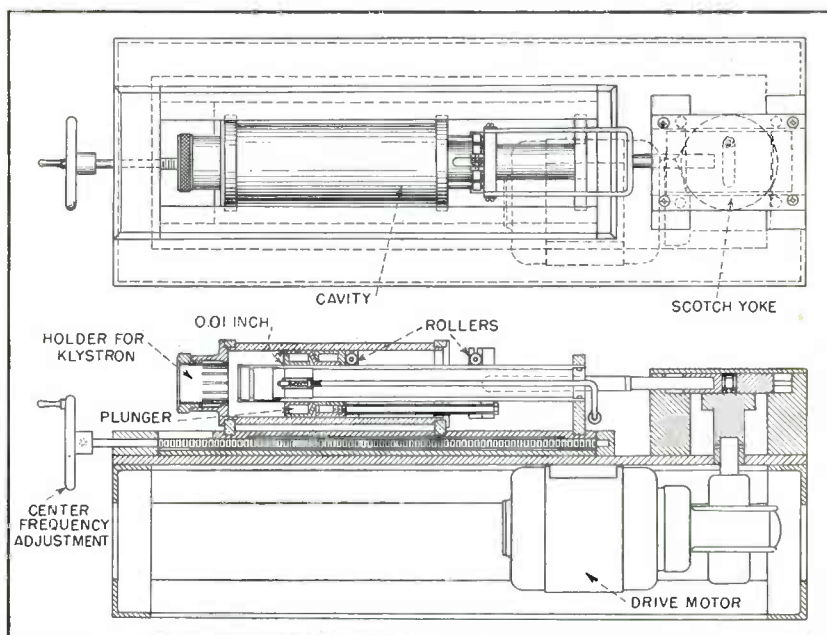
Mechanical details of 2,600 to 3,400-mc klystron sweep generator
